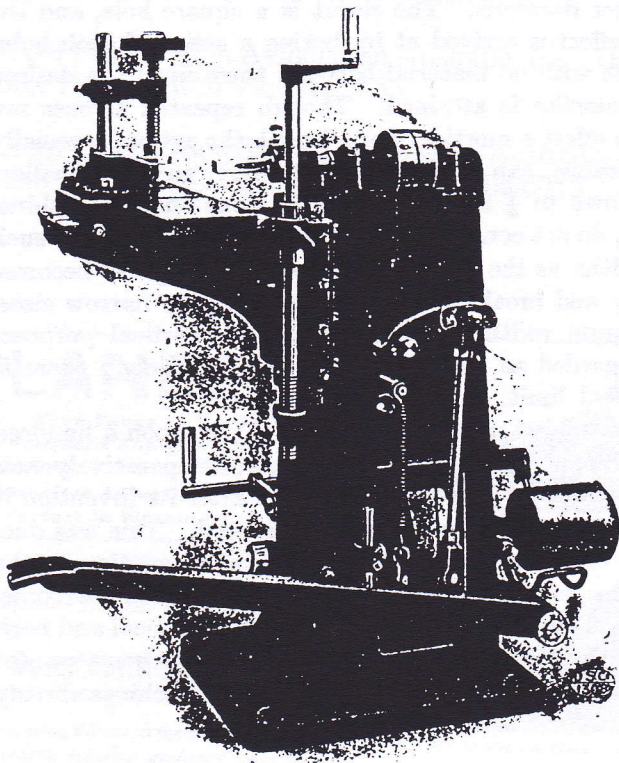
HORIZONTAL HOLLOW CHISEL MORTISING AND BORING MACHINE
